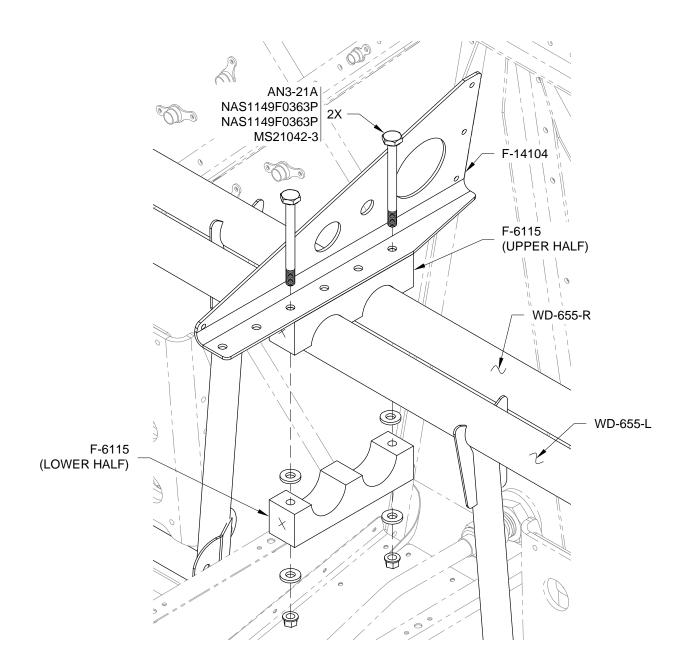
INSTALL RUDDER PEDAL BEARING BLOCK
